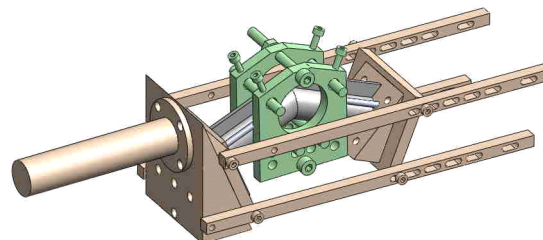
EBW jig to fabricate CSWG-HOM coupler.
